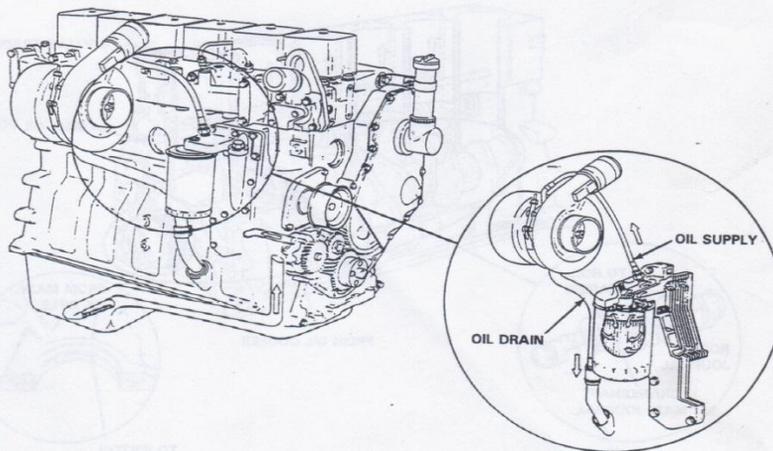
Engine Lubrication System (Sheet 2 of 2)
